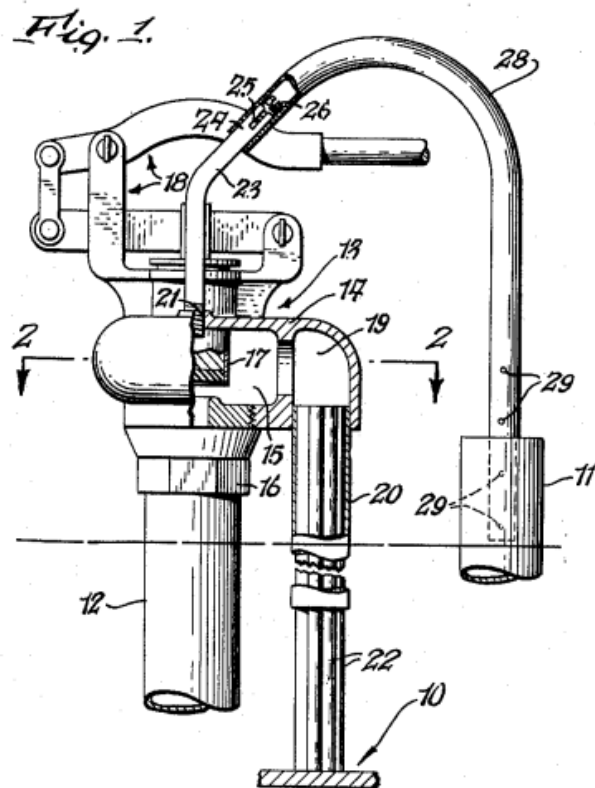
depicts a portion of the toilet flush tank, having a ball cock valve assembly. *Id.* at 2:25–31. Ball cock valve assembly 13 has main
